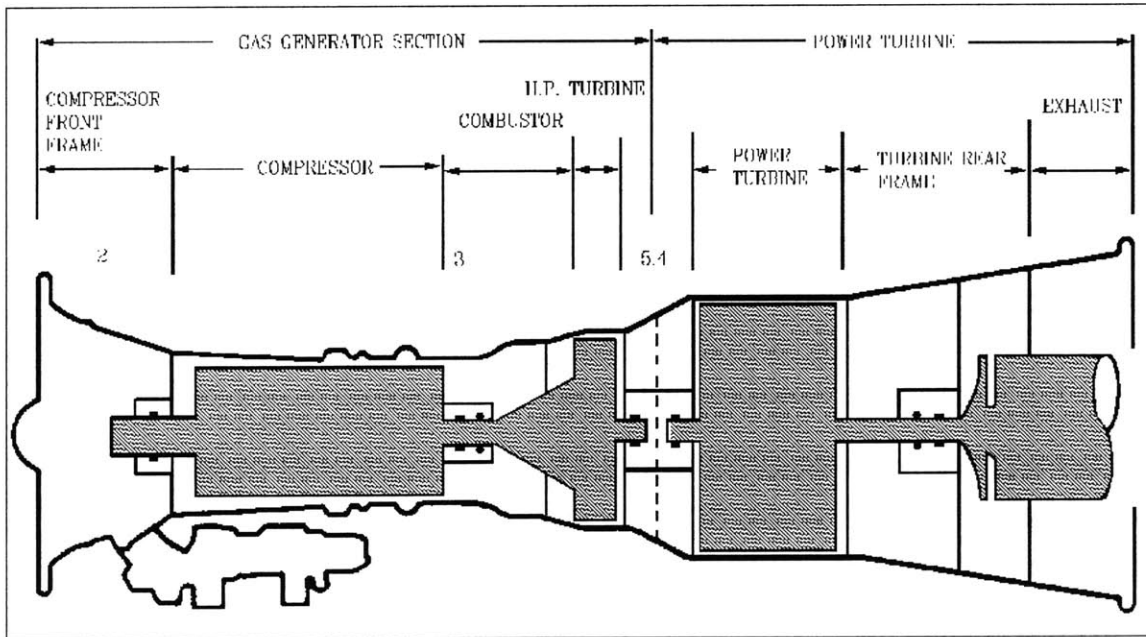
LM2500 Gas Turbine Assembly (Cutaway View) from Reference 12
